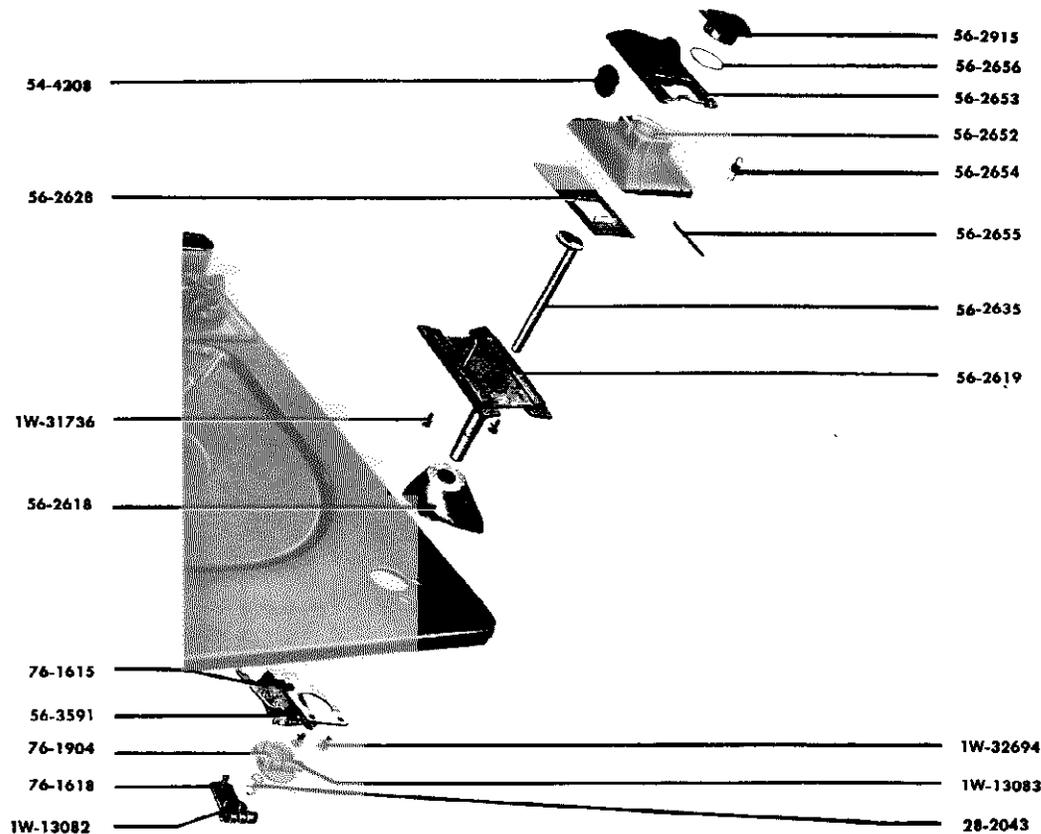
RECORD SHELF AND ASSOCIATED ASSEMBLIES, EXPLODED VIEW.
